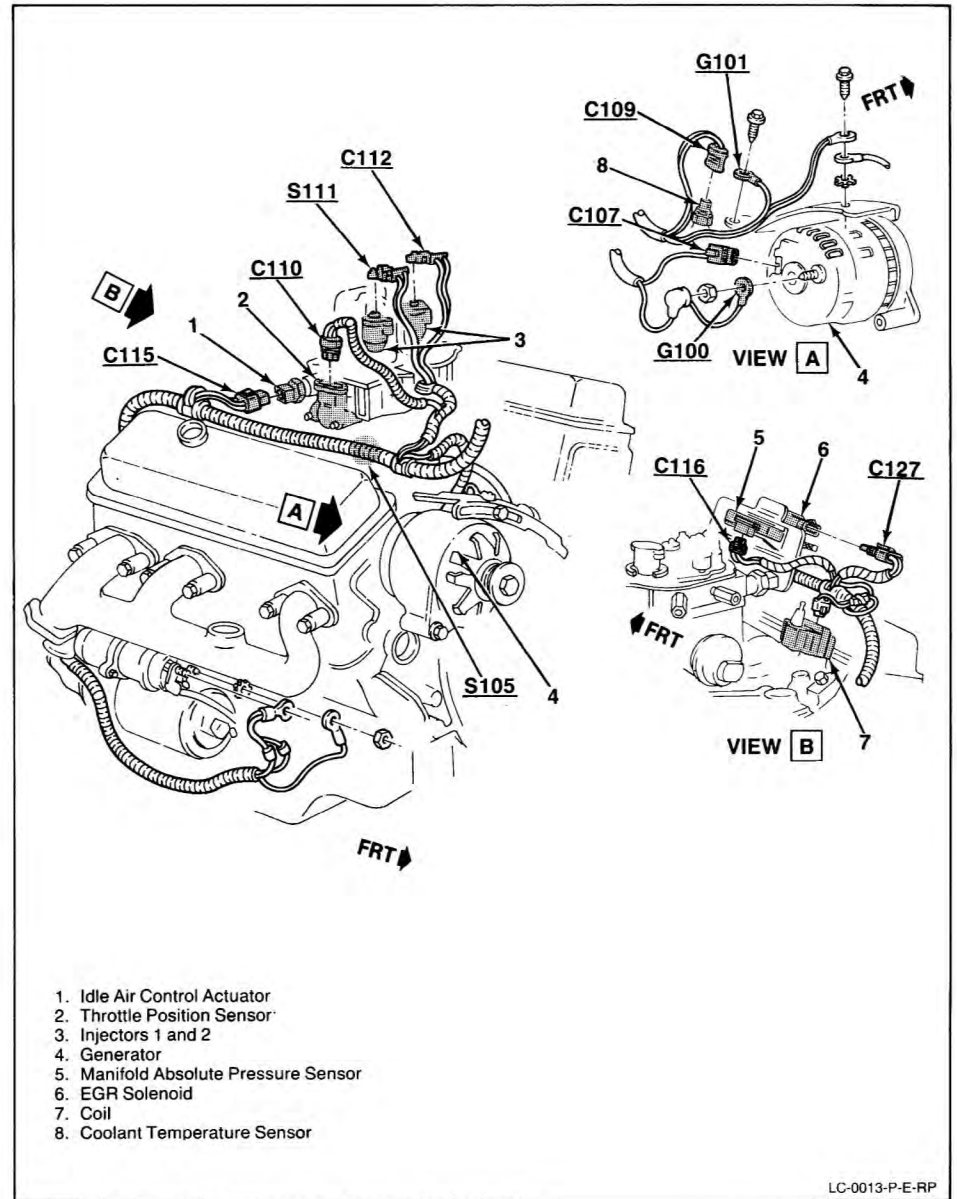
Engine Wiring Harness, RH Side (RPO LB4 w/P42)
